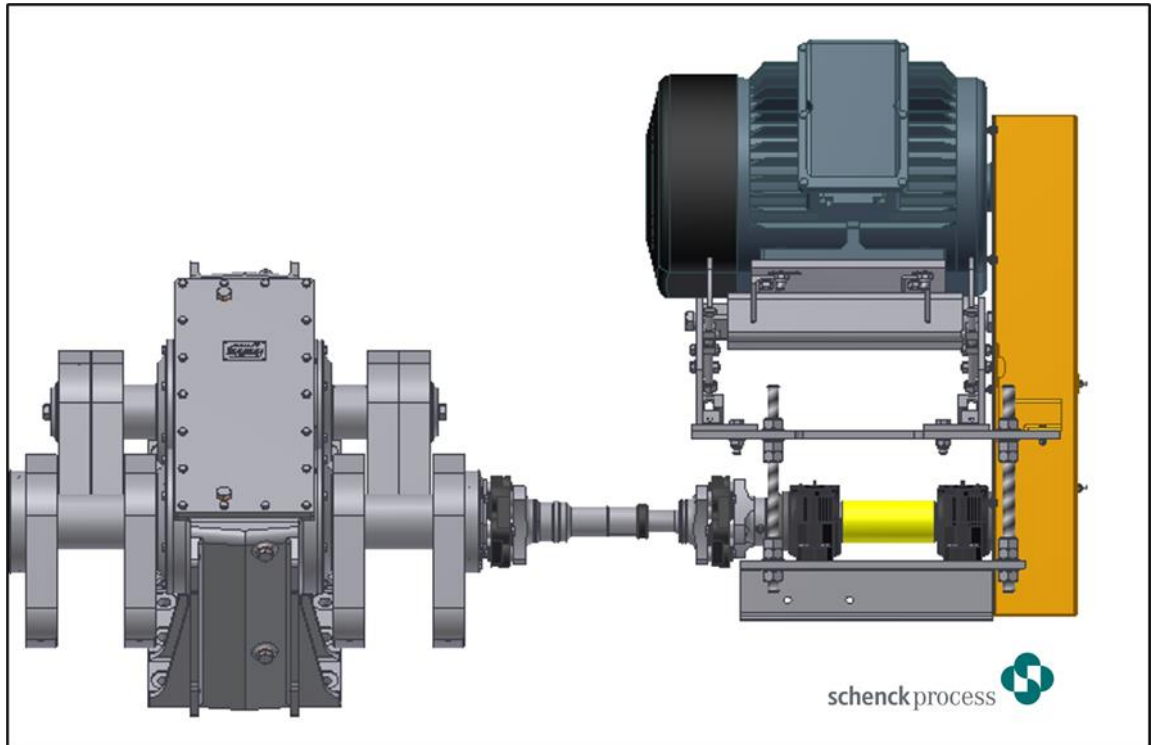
Generic Exciter Drive Shaft and Coupling Assembly
